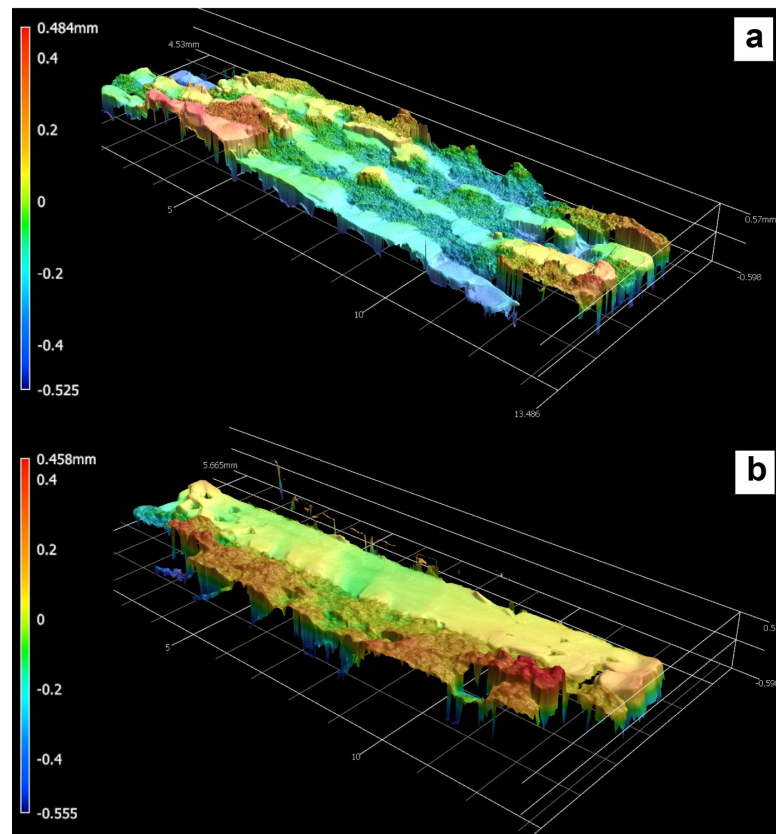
3-D scans of fracture surfaces of multi-material ULTEM 9085 + ULTEM 9085 CF parts with layering patterns ABABAB (a) and AAABBB (b).
